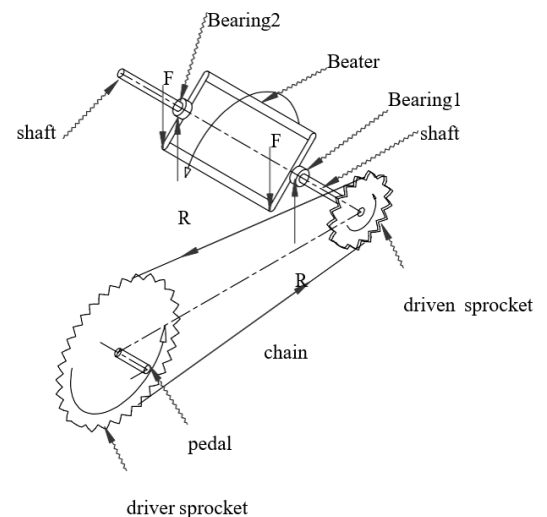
Schematic drawing of Pedal Operated Washing Machine
